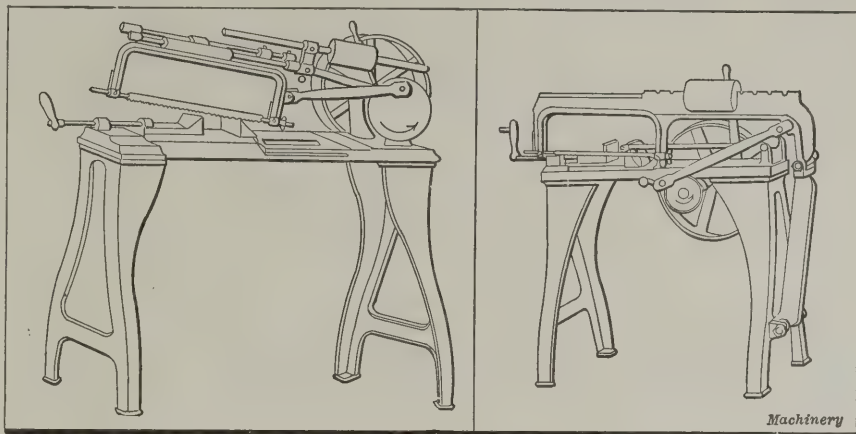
The Star, the First Type of Hacksaw Machine. Fig. 2. The Simplex, another Early Type
